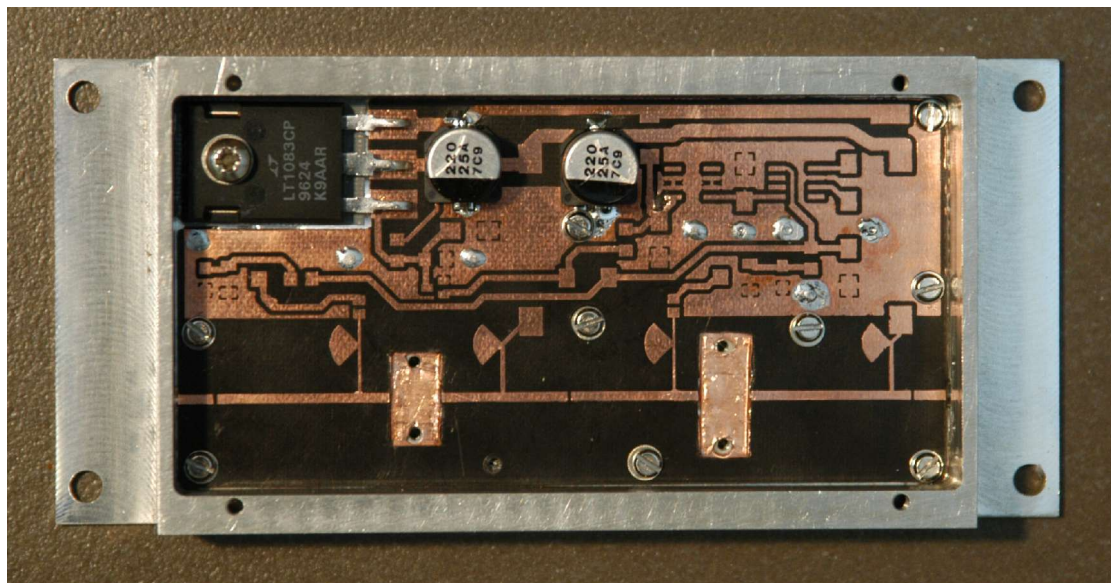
PCB mounted in milled aluminium case and with a couple of “impossible to solder when in the box” electrolytic capacitors mounted.
